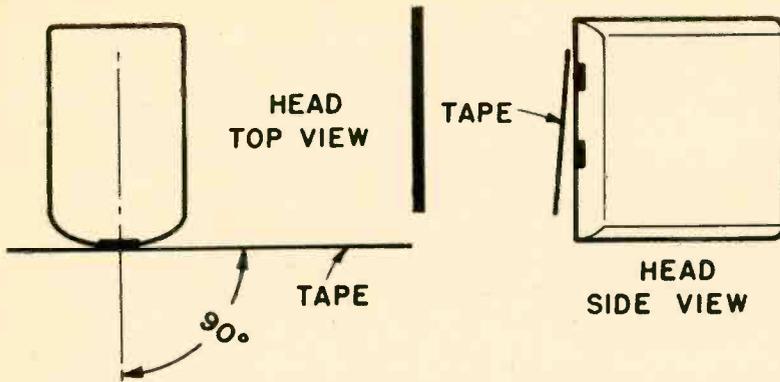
Contact angle (left) is tangent at which tape contacts head. It should be 90° to head's centerline. Tilt (right) is deviation from parallel between surfaces of tape head and tape. Tape and head should be exactly parallel at contact (it's shown away from head here for illustration purposes).
